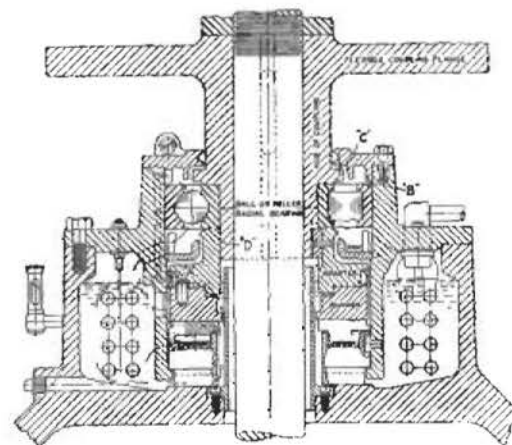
Kingsbury Thrust Bearing combined with ball or roller radial bearing. Water cooling coil permits high speed. STANDARDIZED: See Bulletin M.
